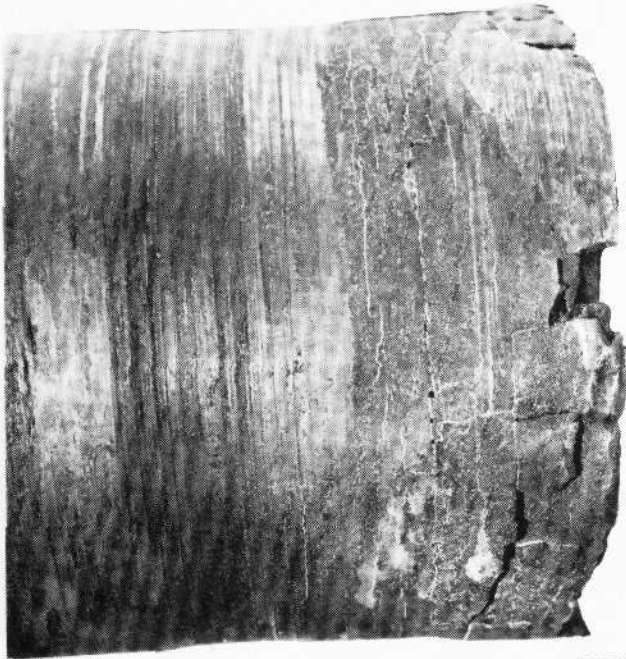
Support Bearing Failure Due To Lack Of Lubrication
